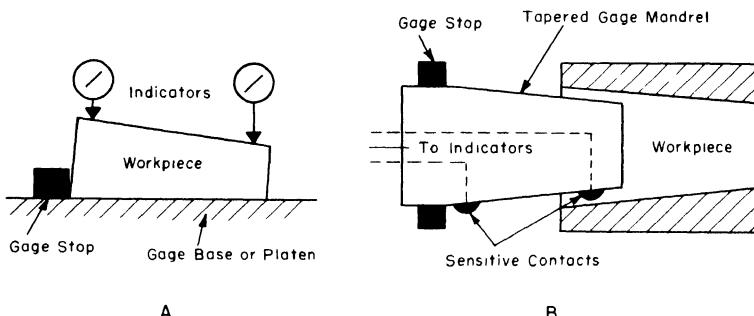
(A) External taper measuring set-up in which two dial indicators are used. (B) Internal taper measuring set-up which utilizes two dial indicators.
